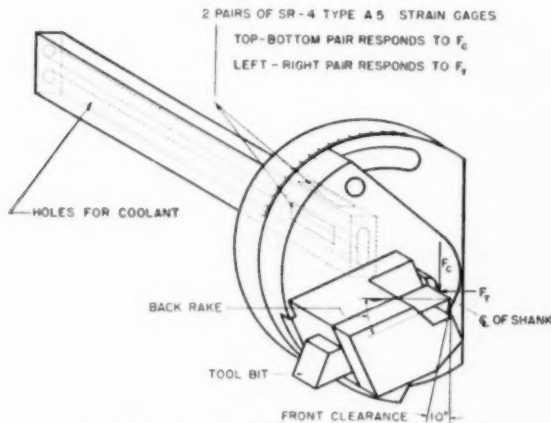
SCHEMATIC DRAWING OF TOOL DYNAMOMETER
